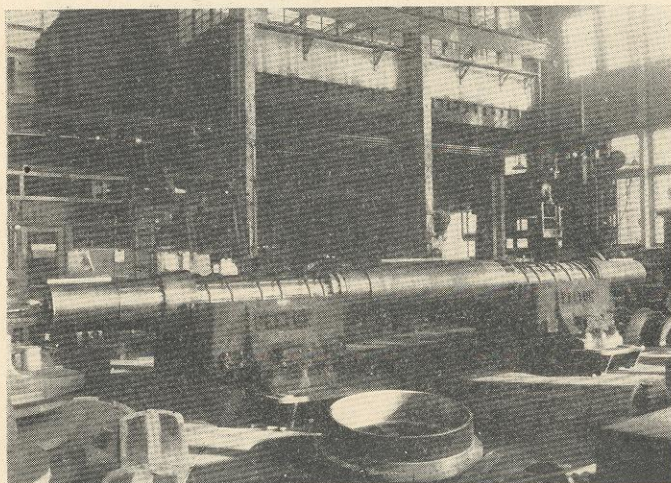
BEARINGS AND SHAFT FOR A 22,500 HP UNIT For the Big Creek No. 2 plant of the Southern California Edison Co. The head is 1860 feet.
